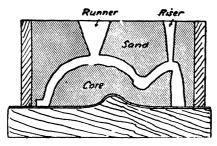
Type-metal Mould for Doll's Head: Reverse Mould.
